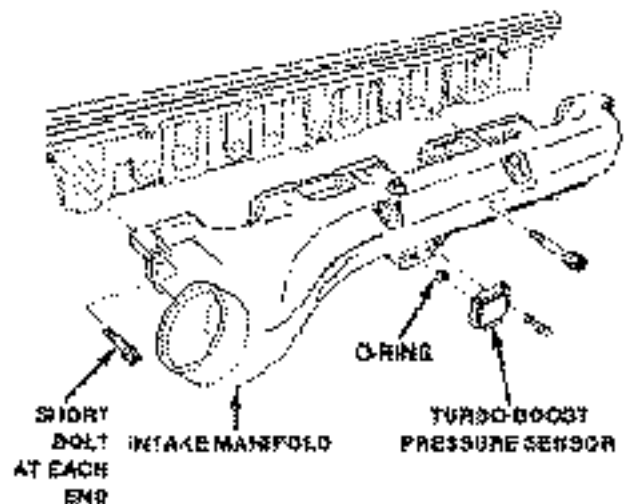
One-piece intake manifold. (Courtesy of Detroit Diesel Corporation.)
